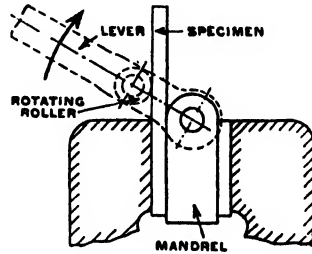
DEVICE FOR MAKING BEND TEST ON SHEET METAL
